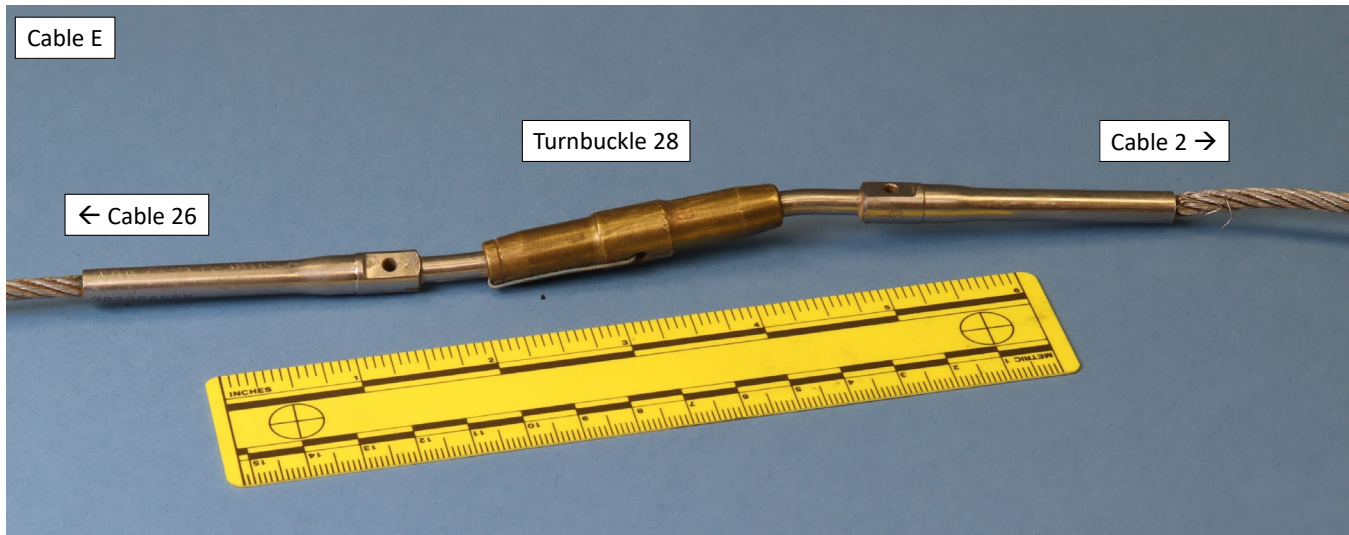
A photograph of the connection of cables 26 and 2 at turnbuckle 28. The threaded terminals on both cables exhibited bending deformation. Two broken wires were observed at the base of the cable 2 threaded terminal.
